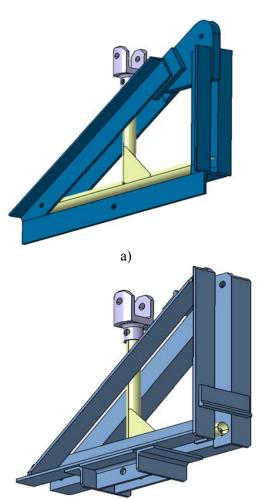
Variants of the testing interface: a) initial design; b) improved design
